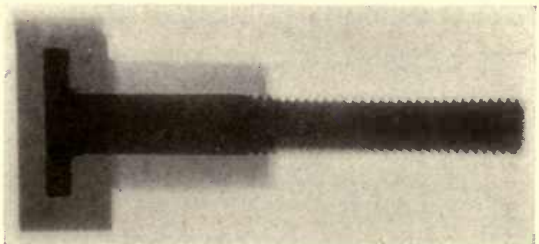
"Moulded Compound" insulation around a steel bolt. Tube 280
